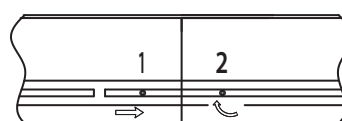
ASSEMBLY OF HINGE ON LUMINAIRE
